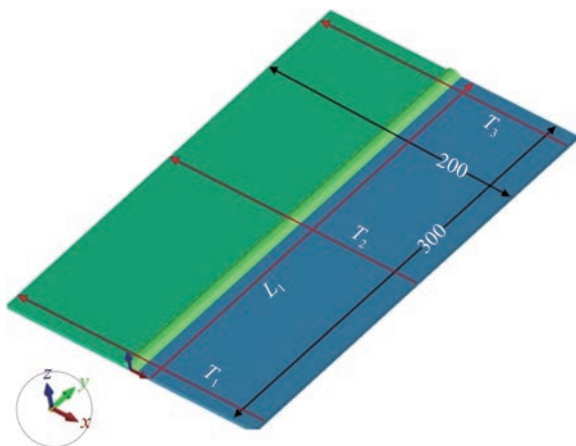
Structure and dimensions of the marine thin plate butt weld (unit: mm)
